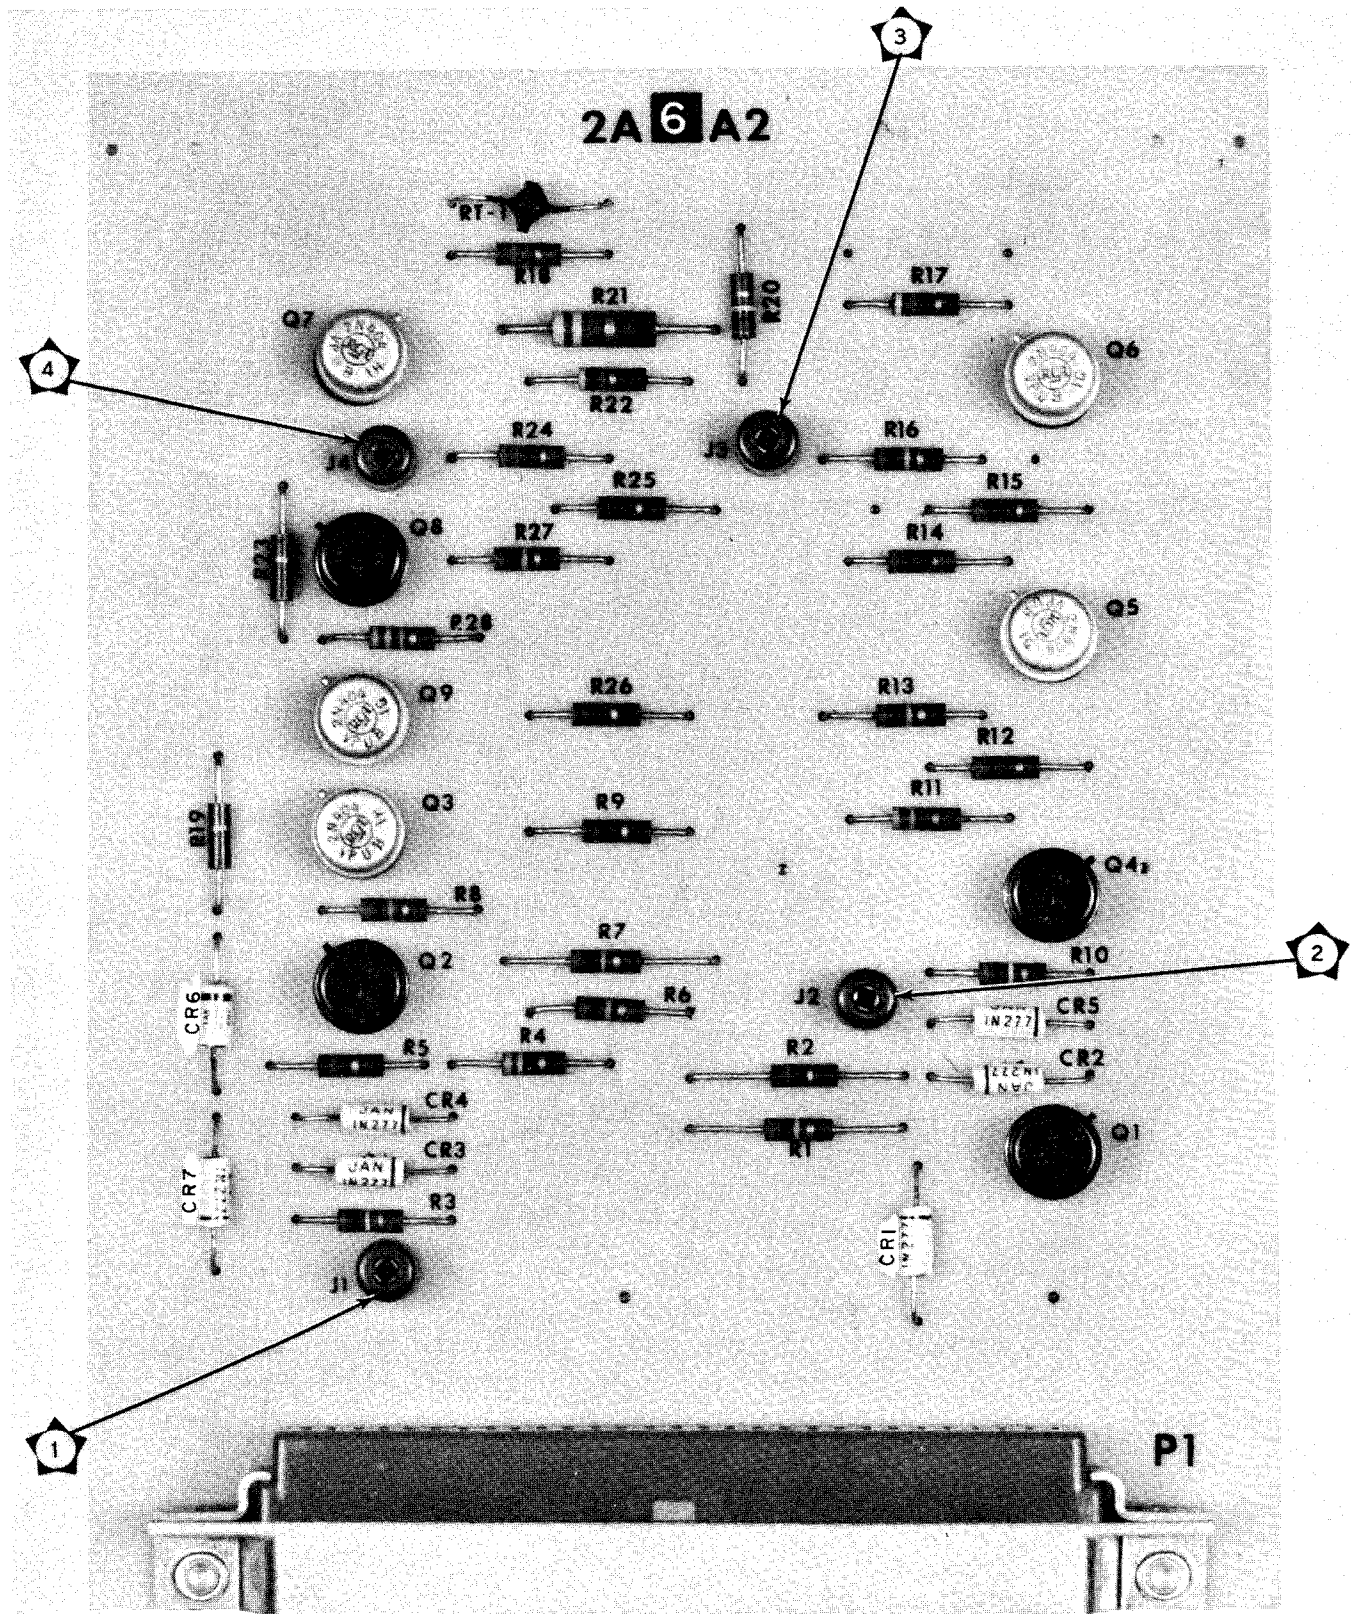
Receiver Code Converter, Printed Circuit Board A2
